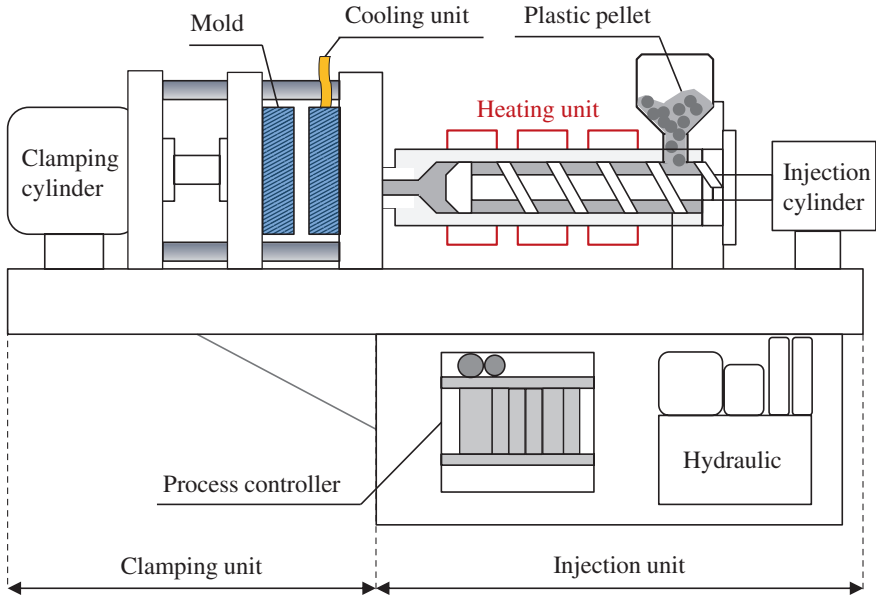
Illustration of a hydraulic-type injection molding machine
